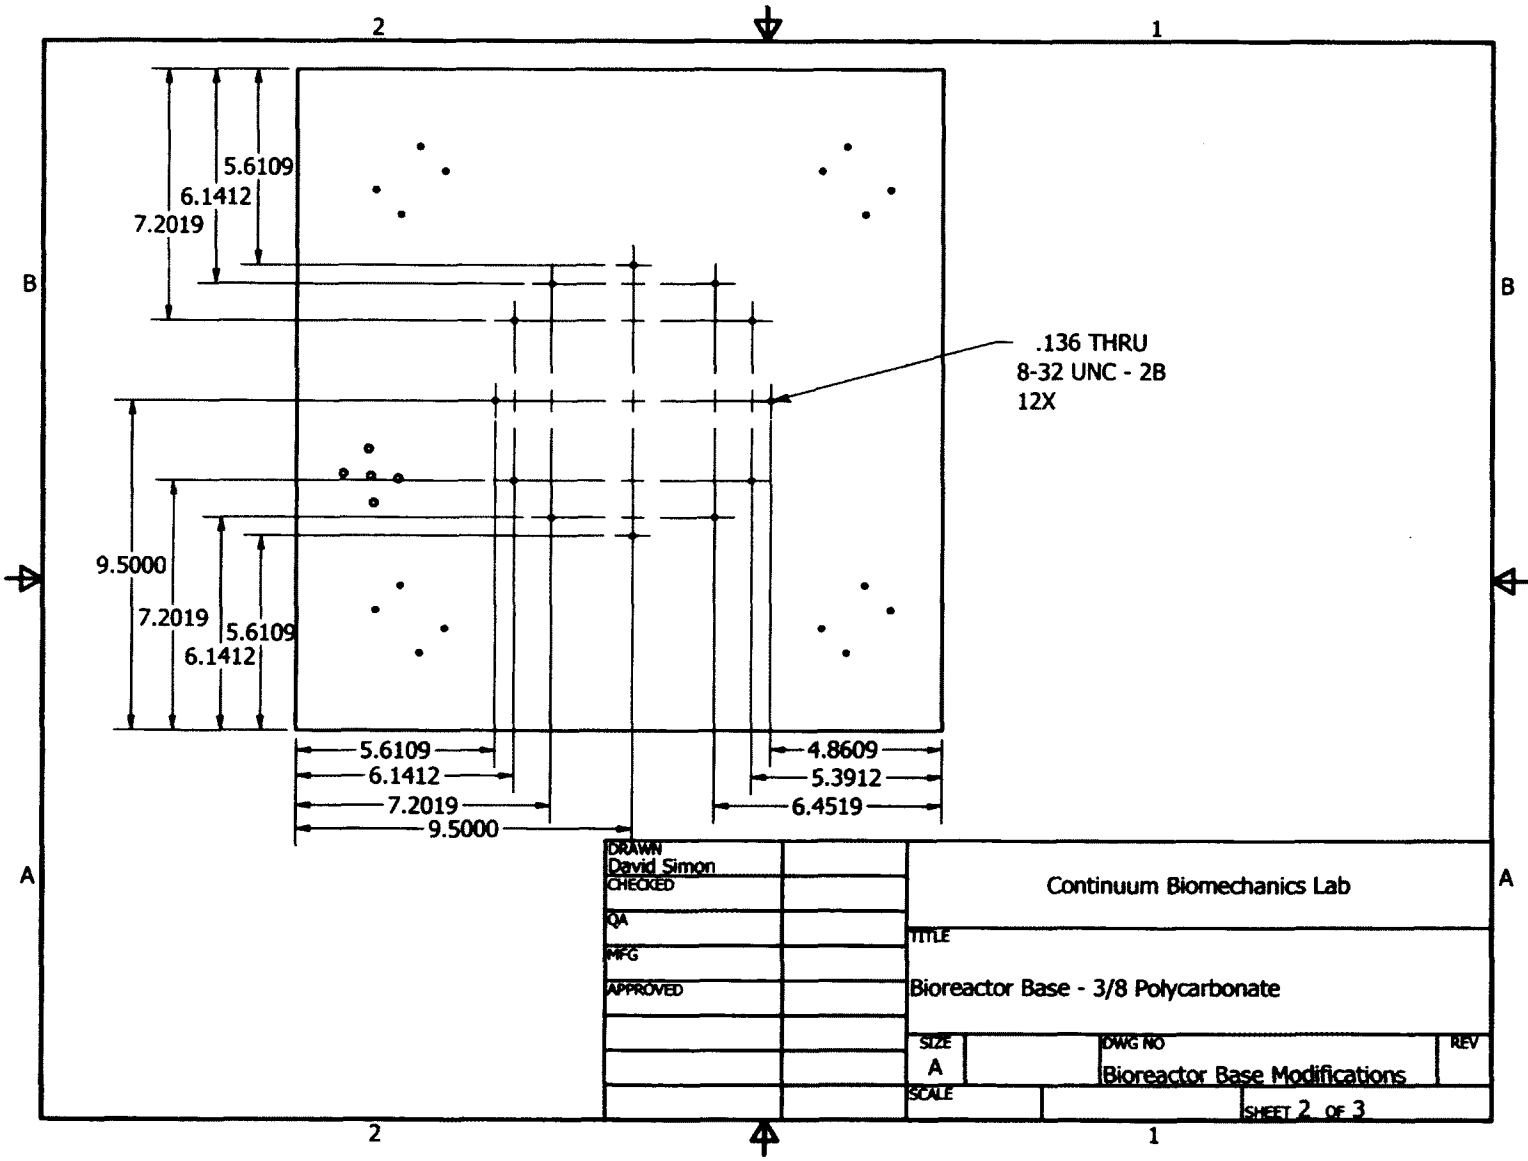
System baseplate technical drawing #2. Provides locations for bioreactor baseplate tapings and tapings for the linear screw end supports. Units are in inches.
